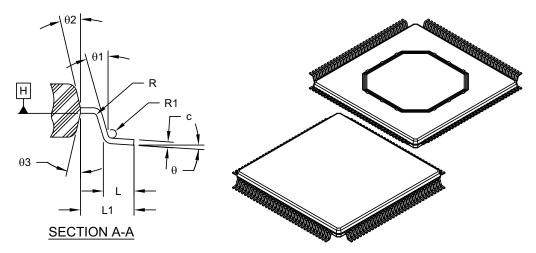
PACKAGE (DIMENSIONS)
